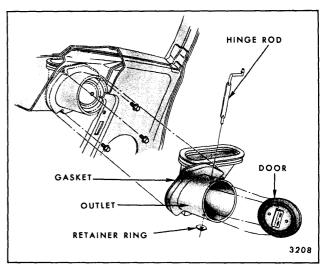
Shroud Center Duct Upper Air Outlet and Door - "F" Styles
